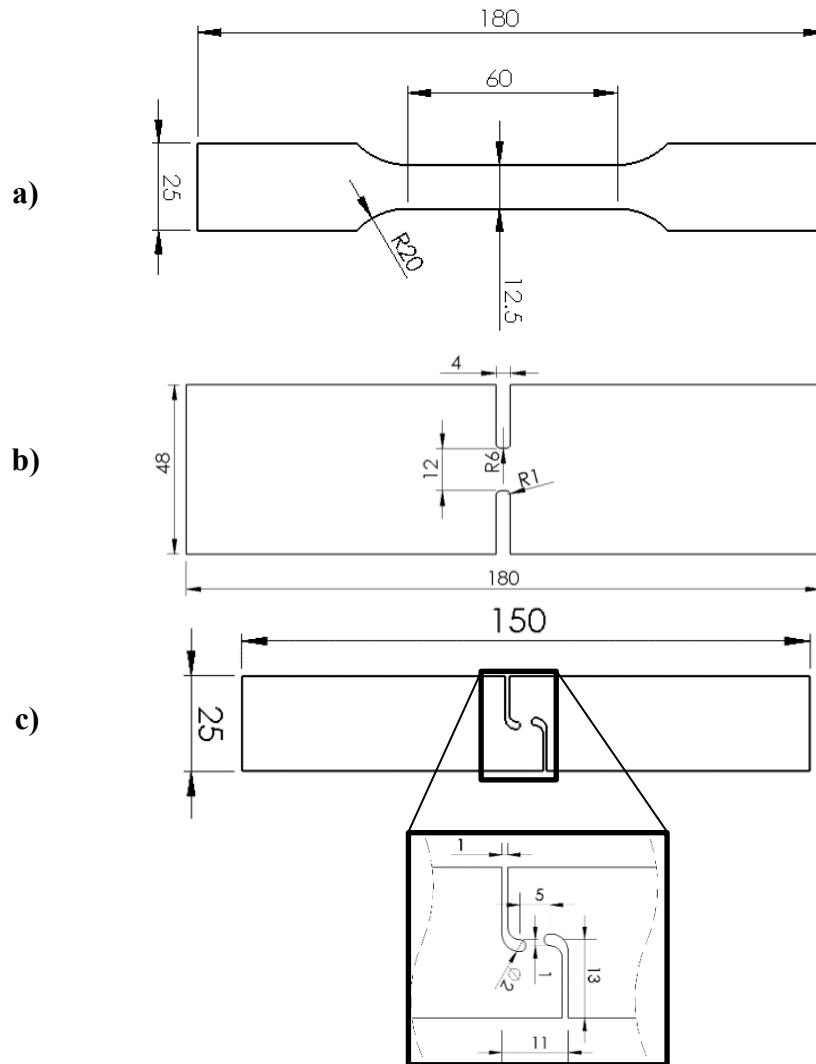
The dimensions of the tensile test specimens a) Uniaxial, b) Plane strain, c) Shear
